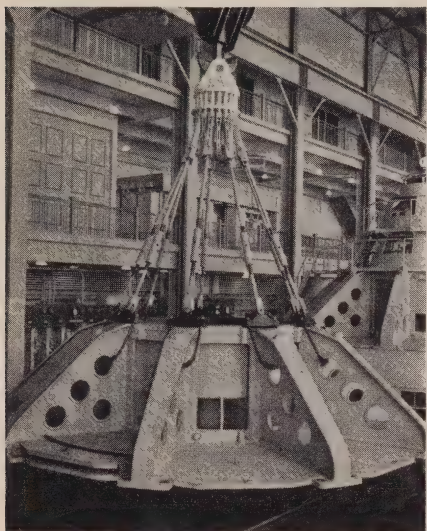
Lifting head with nine rods and yokes lifting upper bracket with Kingsbury assembly weighing about 50 tons.
